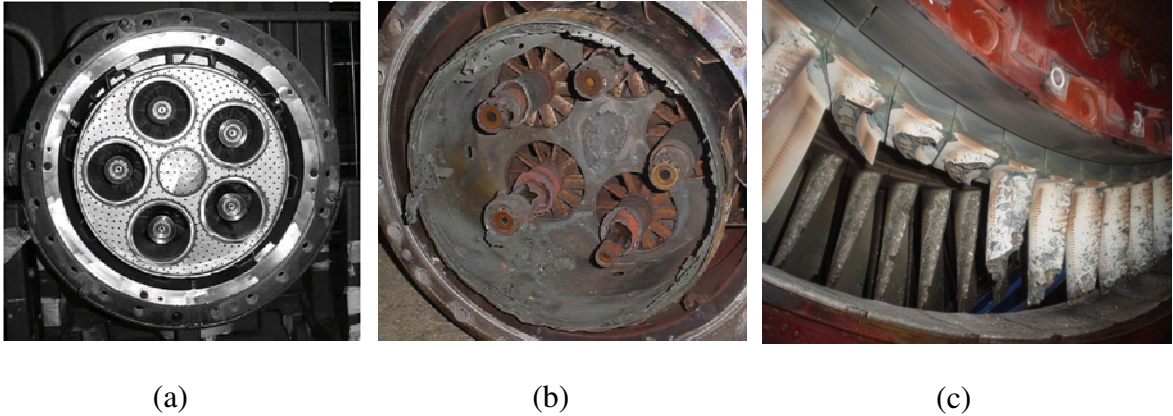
Illustration of damaged combustor components. Reproduced from [13] – (a) New burner assembly; (b) Destroyed burner assembly; (c) Destroyed turbine blades
